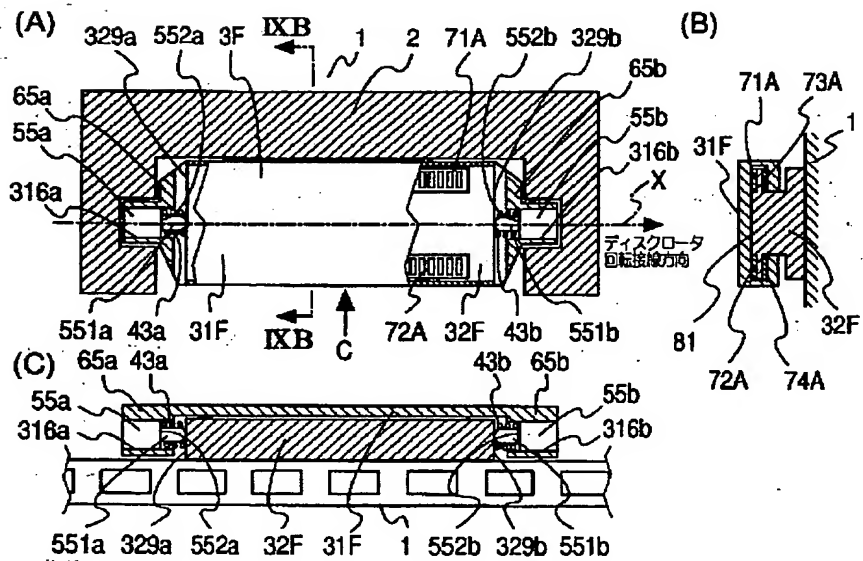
consists of three cross-sectional views of a disk drive assembly.
